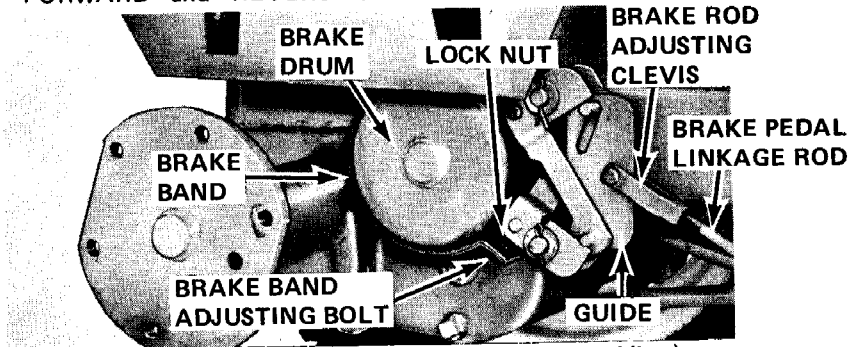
(Tire and Wheel Removed for a Clear View)
